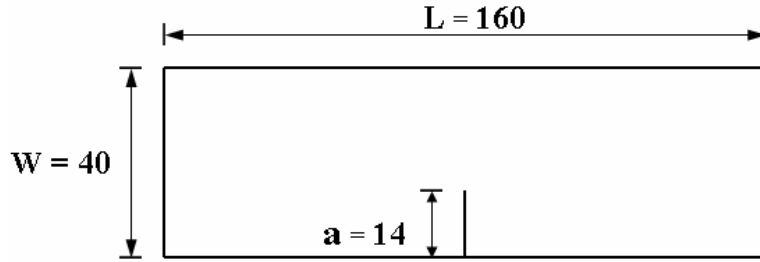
Dimensions of Straight Edge Crack Plate (All dimensions are in mm)
